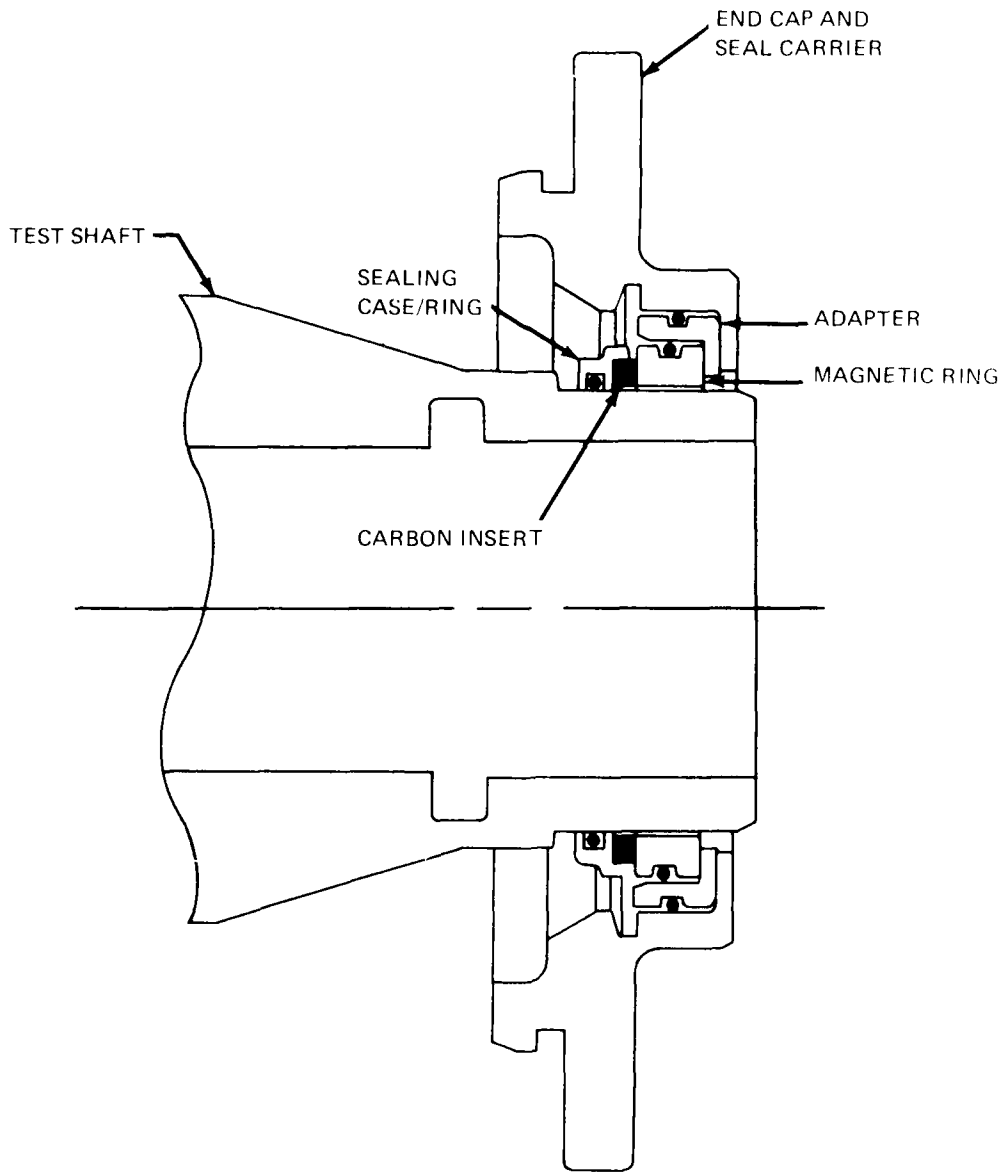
Magnetic Seal Tested in Conjunction With Advanced-Concept Transmission Tapered-Roller Bearings.
